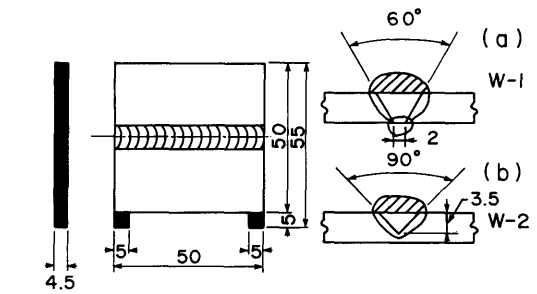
(W type) specimen: (a) both side welding (it called W-1), (b) one side welding (it called W-2)
